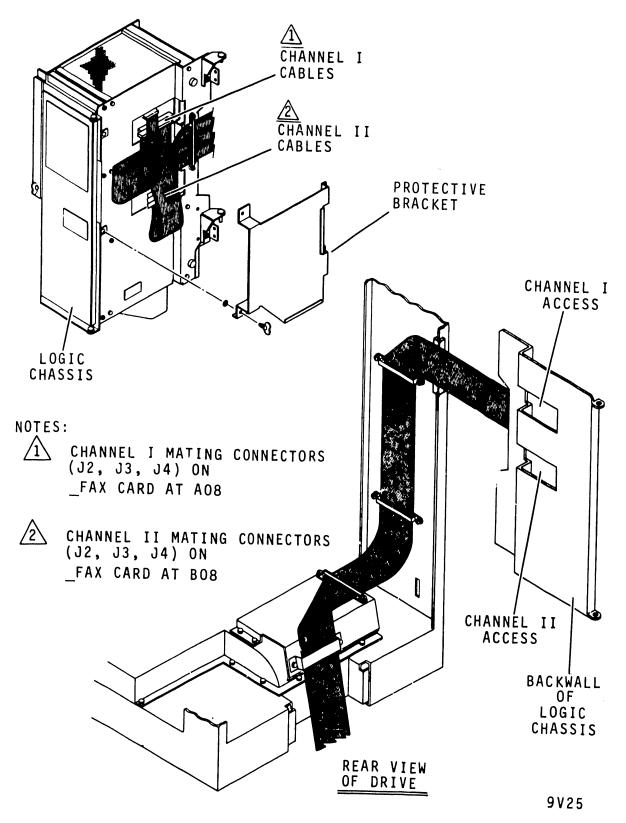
Flat Cable Installation (S/C 08 & Below)
